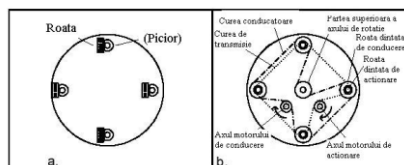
Synchronous drive configuration with 4 wheels: a) view from the bottom; b) vue de dessus.
